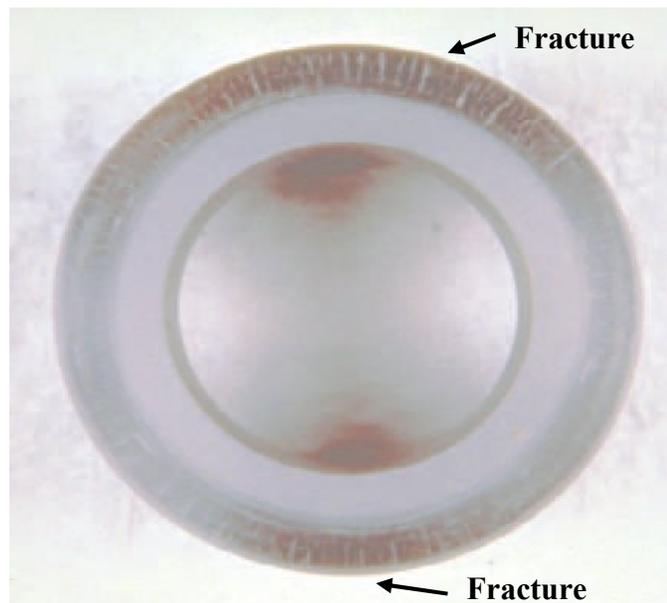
Ceramic Ring with Heat Checking Cracks [2]
